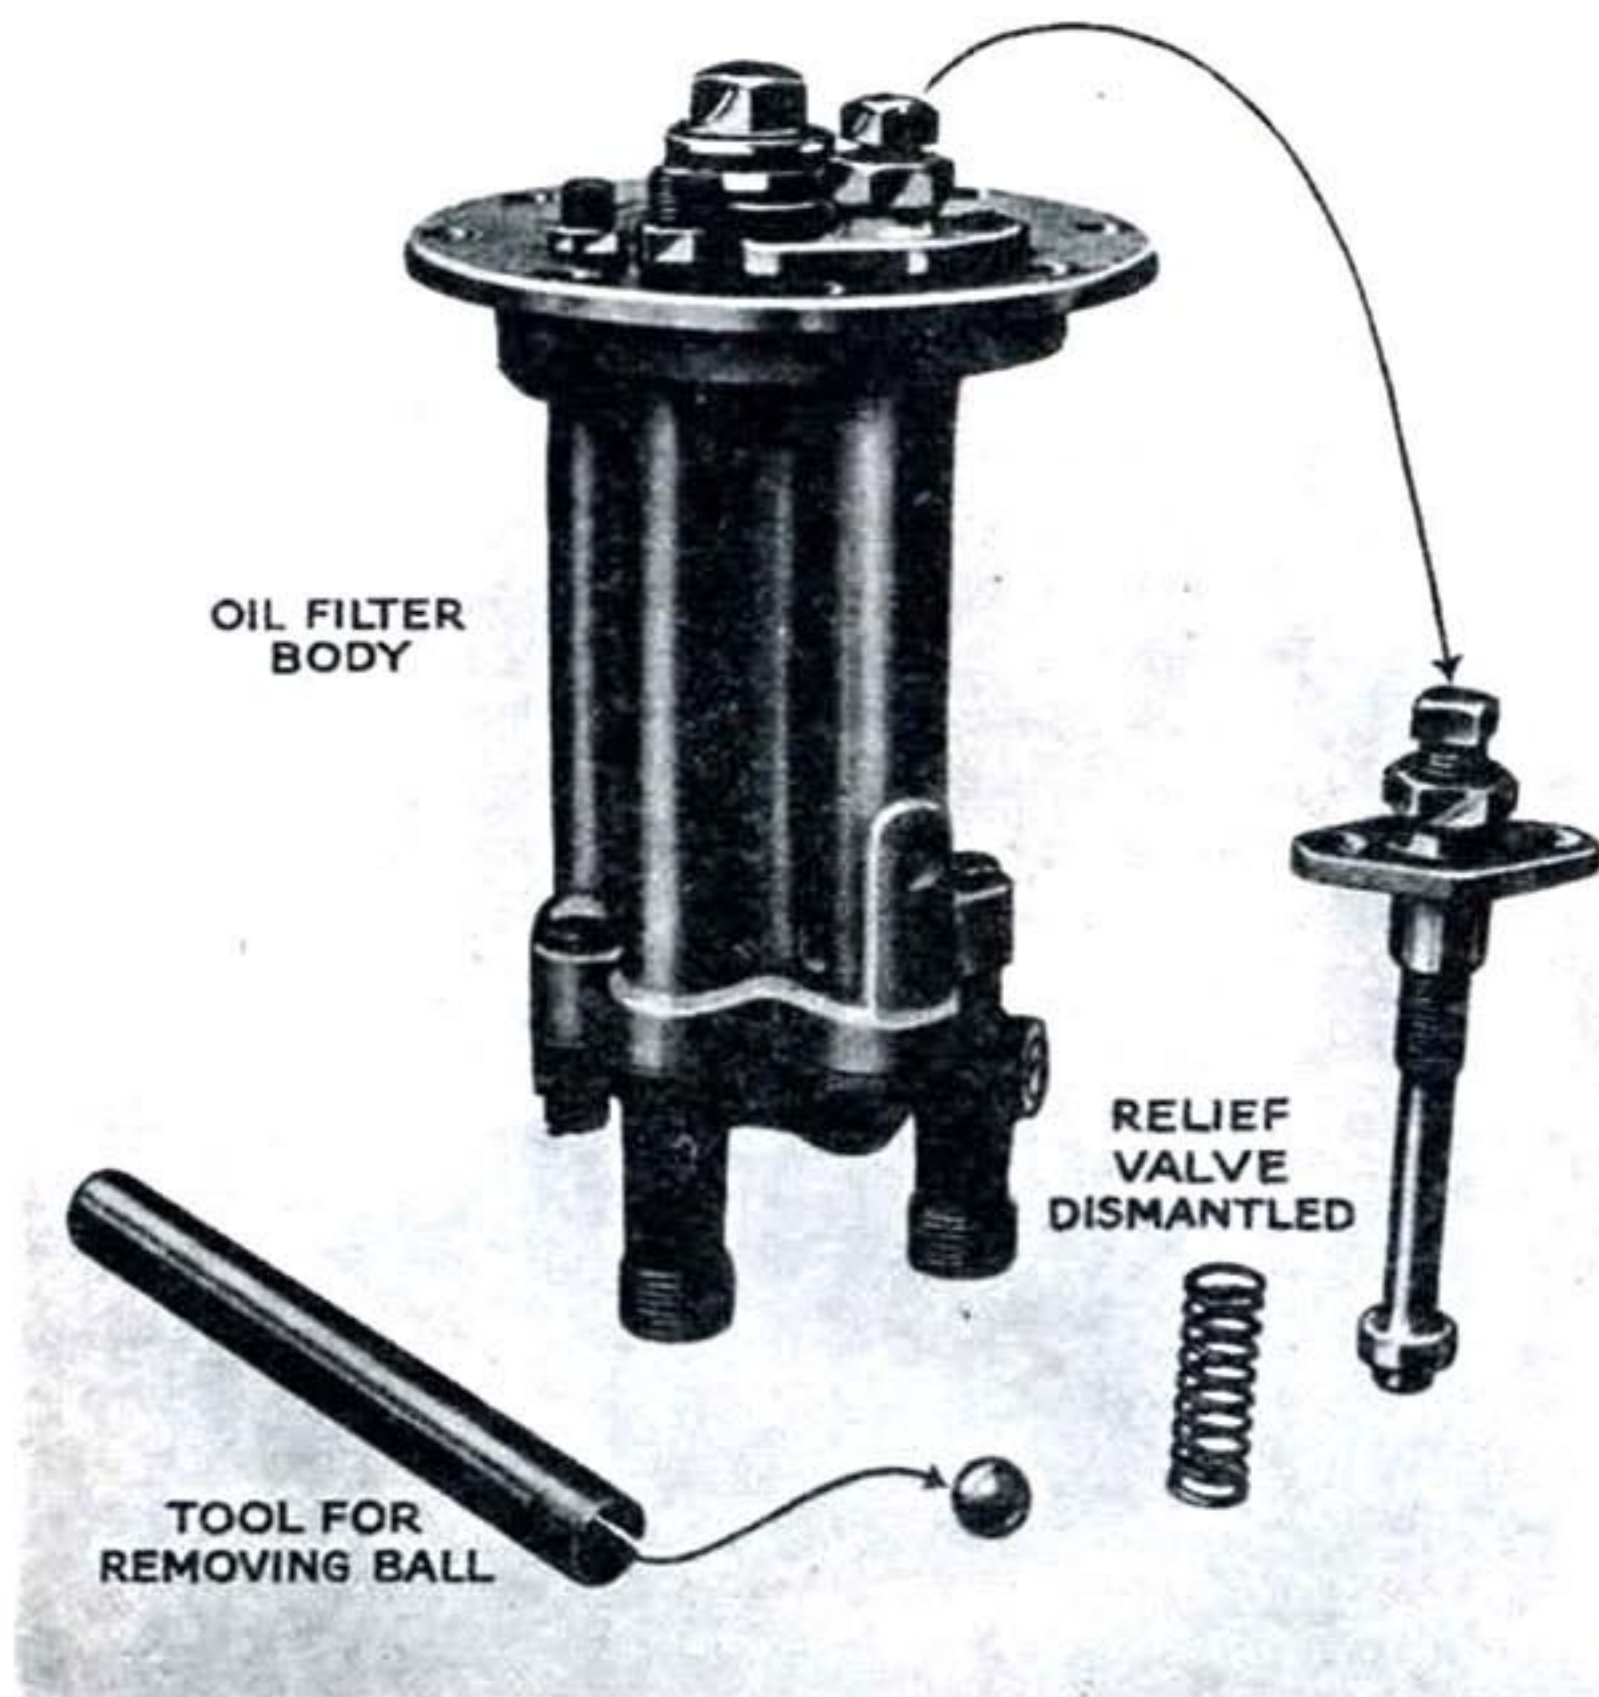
OIL FILTER BODY AND OIL RELIEF VALVE.
